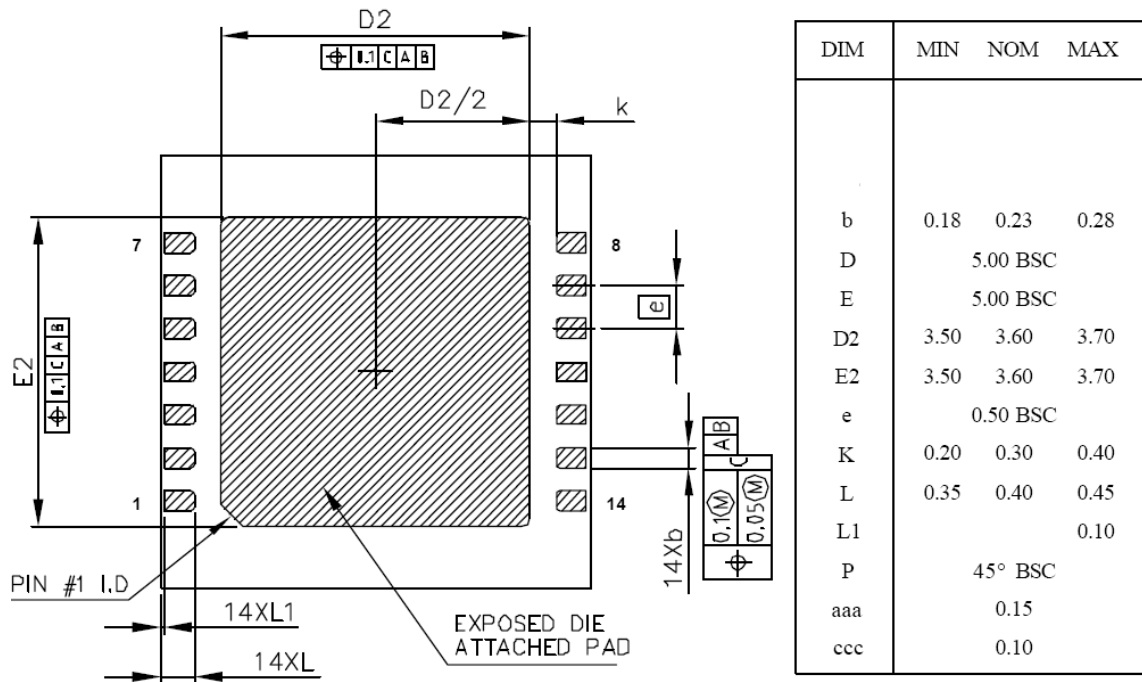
5 x 5 x 1.8 mm package outline diagram with dimensions.
